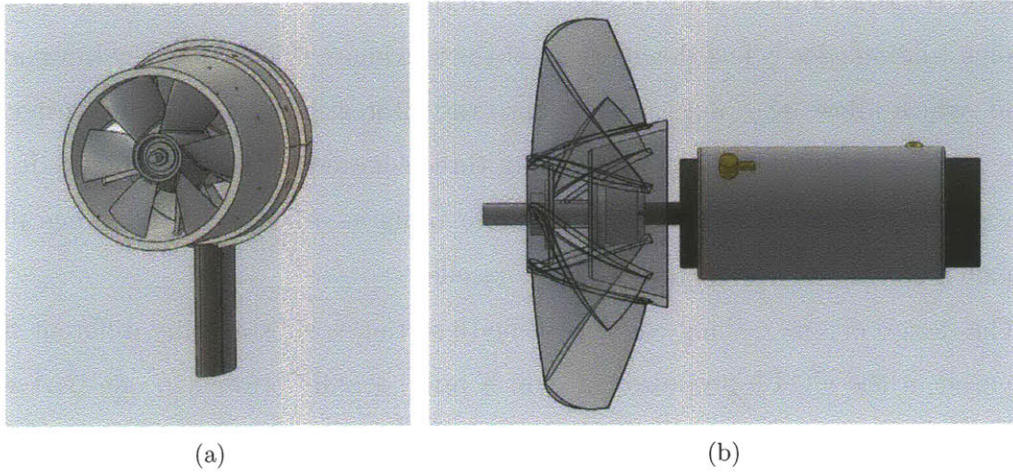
Rotor attachment: a) installed in propulsor; b) attached to motor shaft using collet-type propeller adaptor.
